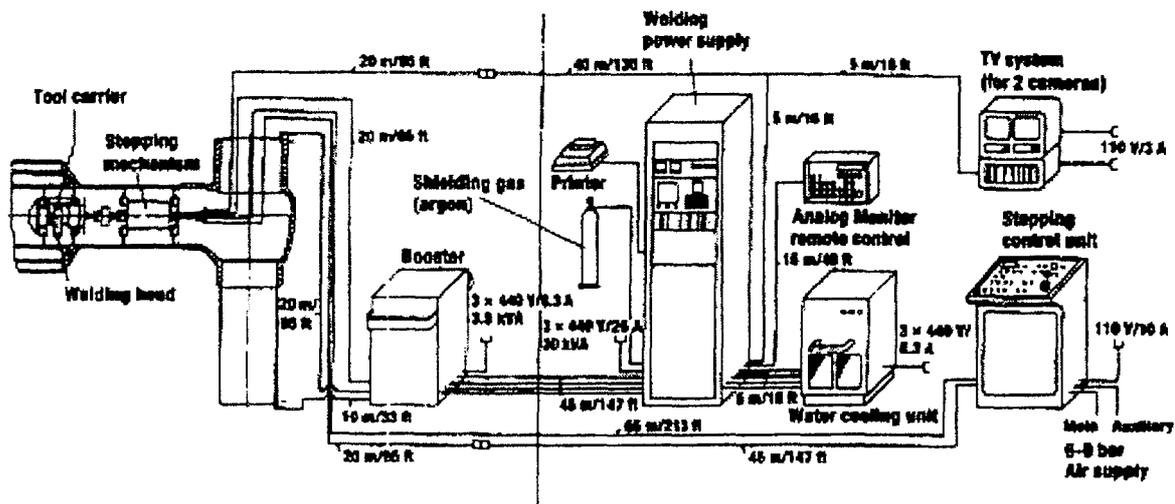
Equipment arrangement for in-pipe welding (sketch)
